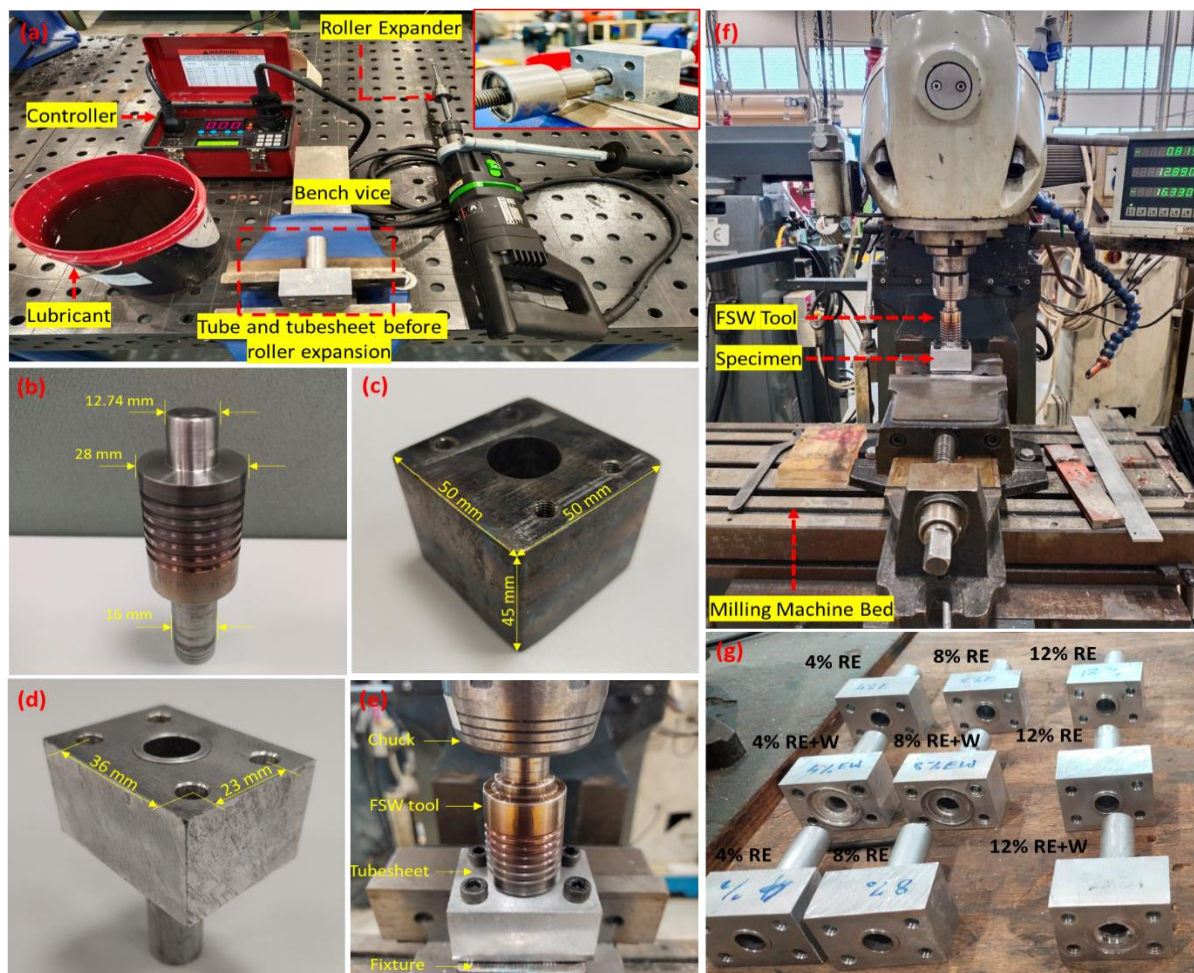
Experimental setup and procedures. (a) Roller expansion setup; (b) FSW tool; (c) Fixture to hold tube-and-tubesheet; (d) Roller-expanded TTJ; (e) FSW process; (f) Vertical milling machine-based FSW setup; (g) Joints (RE and RE+FSW).
